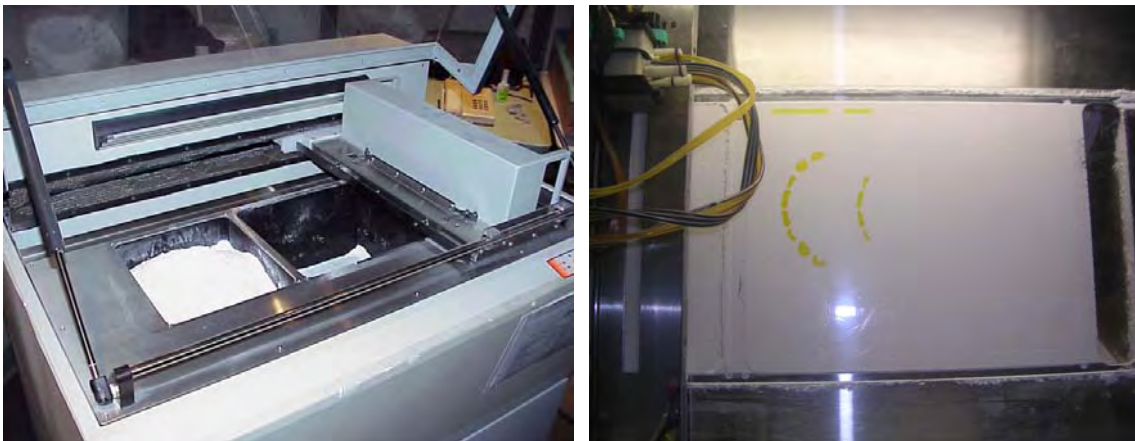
Z Corporation 3D Printer in Making 3D Solid Model
